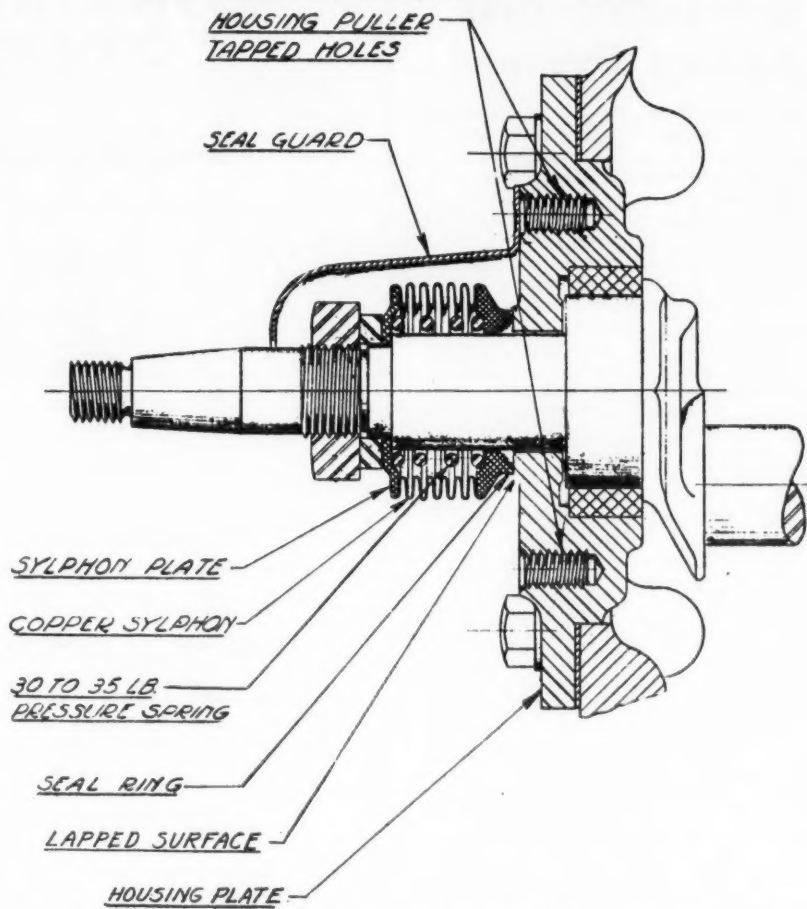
Revolving syphon seal. In this assembly a gas tight seal is formed between the seal nose and a special machined surface on the crankcase housing cover.
